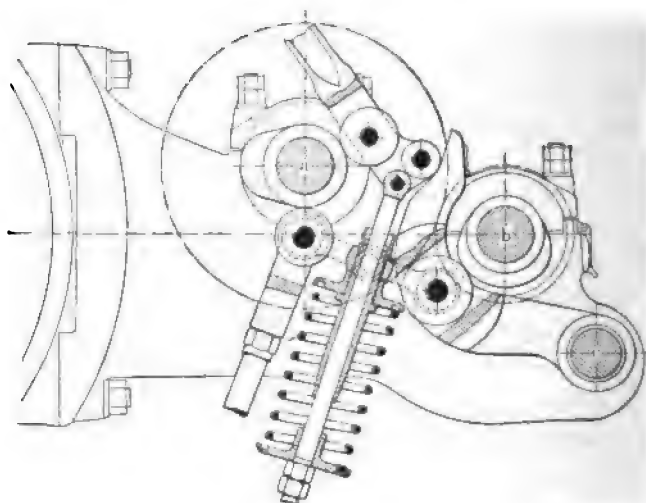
THE DINGLER DOUBLE-ACTING FOUR-CYCLE ENGINE.
